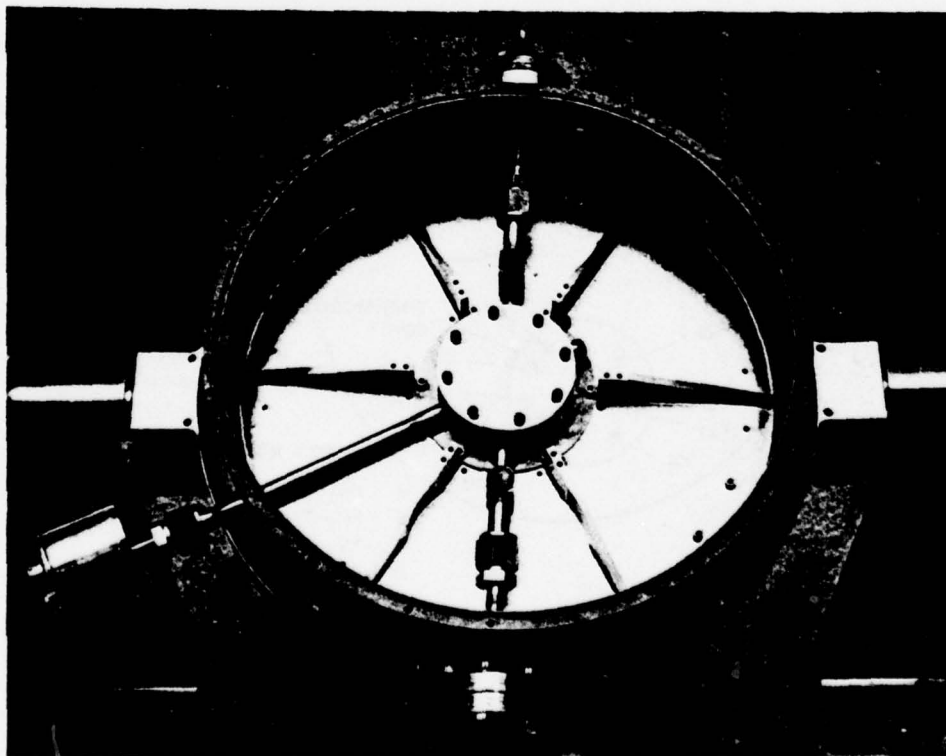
Bottom View of Main Baseplate and Mechanical Structure for State Selector, Output Plumbing Ports and Lower Assembly Cover Cylinder
